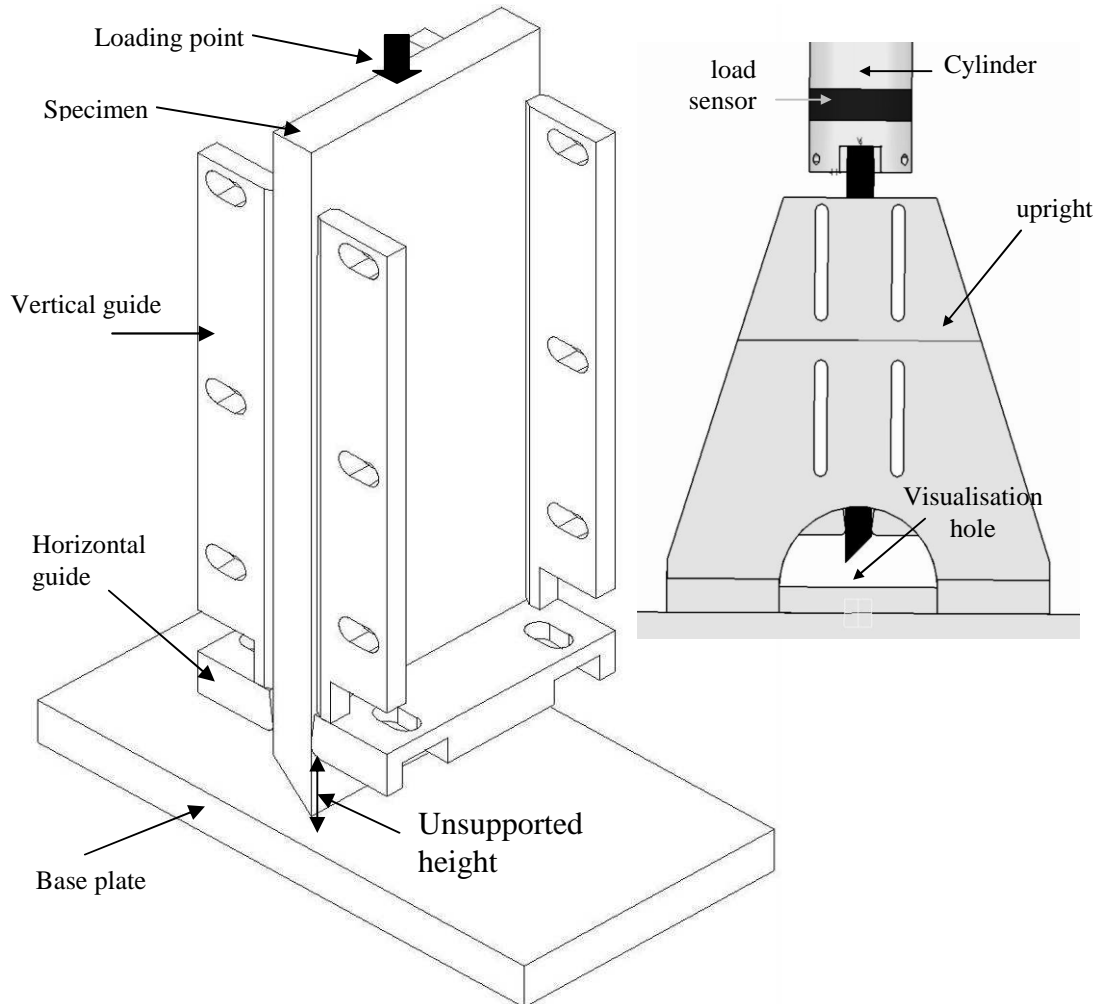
Design of the fixture, with (on left) and without (on right) upright
